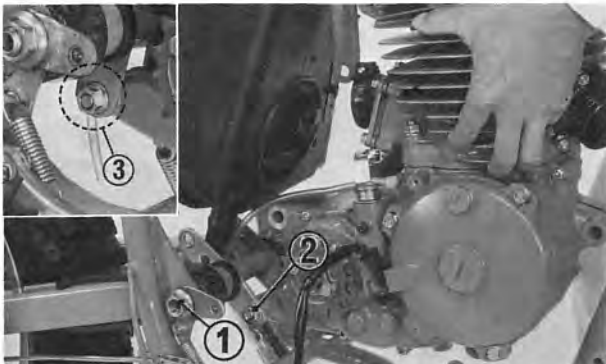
(1) Swingarm pivot bolt (2) Engine mounting
